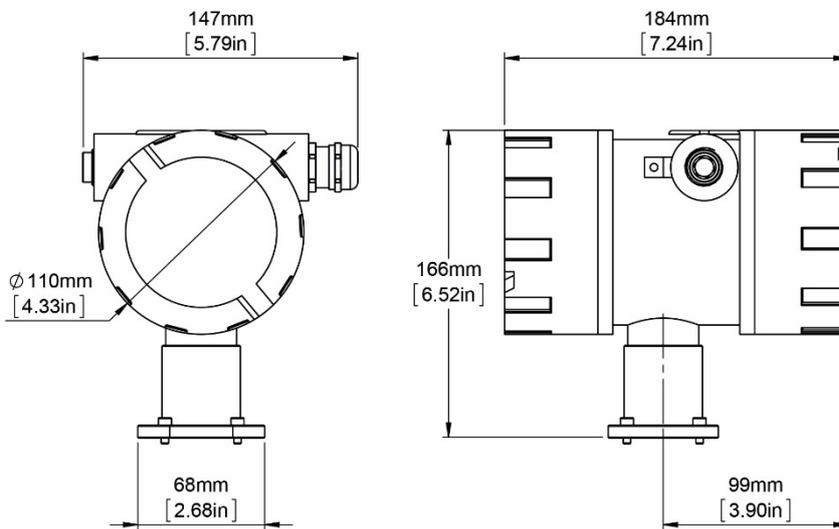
Dimensions Meter-Mount Transmitter TCE 8000/8100 with blind cover
